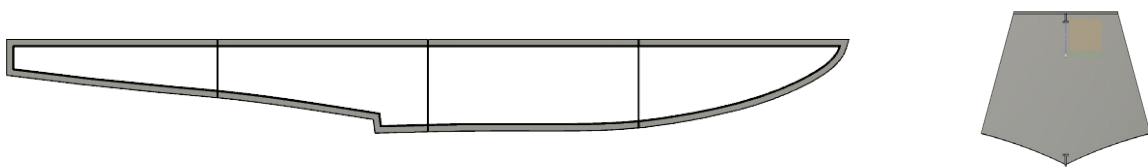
Bulkhead Arrangement and Midship Section Structure
